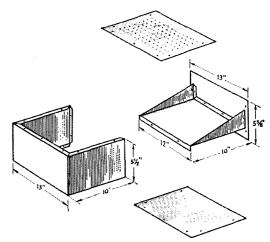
Exploded view of the homemade chassis and cabinet used by K5BUQ. The chassis, front panel, and top and bottom plates are 0.051-inch aluminum, and the back cover on the left is 0.040-inch stock.
